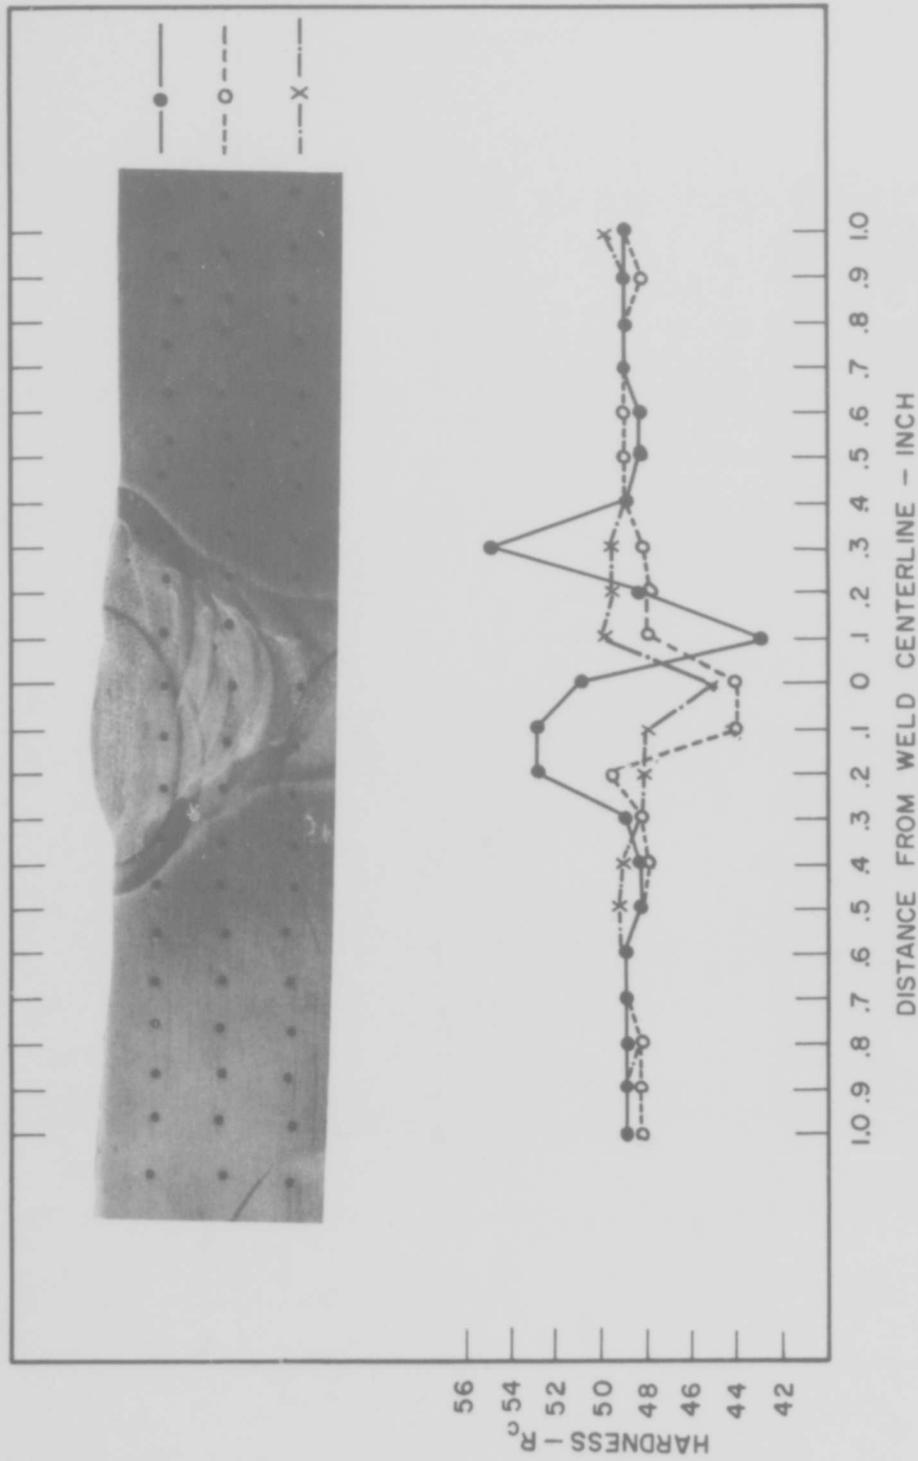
Hardness Survey of TIG Weld No. K297 Made in D6AC Plate at 10 ipm Using Argon Shielding, Filler Wire No. 1, and No Preheat.
